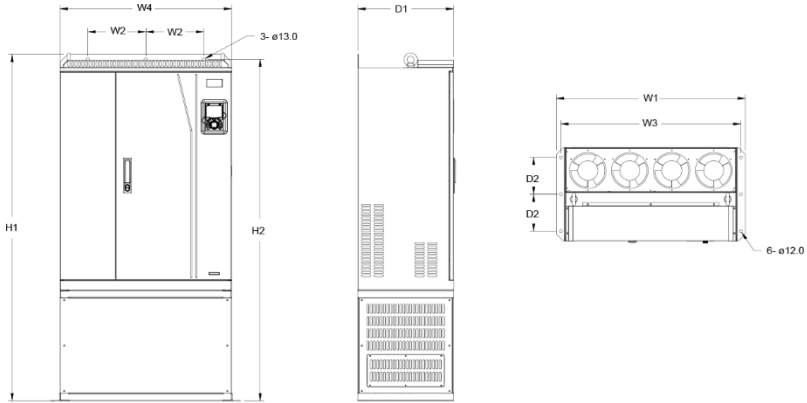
Floor installation diagram of inverters of 660 V, 250 to 355 kW
